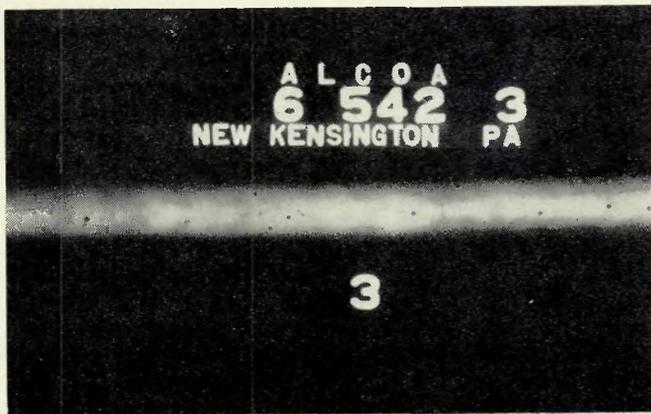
Radiographic image of a 4043 weld in a 1/2-in. thick 6061-T651 panel welded with the gas metal-arc method
